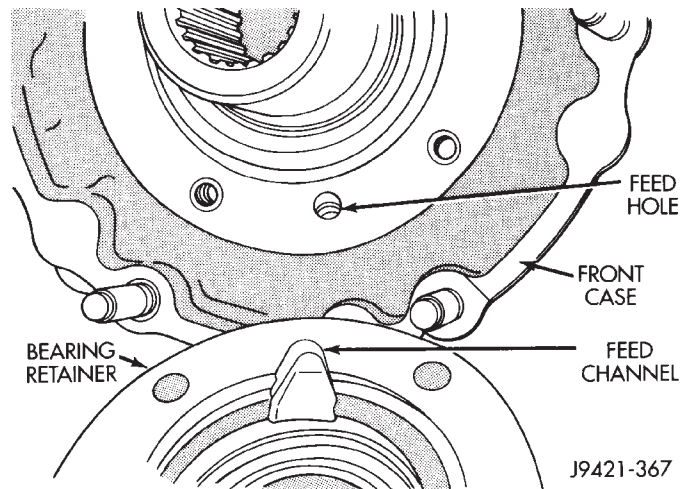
Aligning Retainer Oil Channel With Feed Hole In Case
